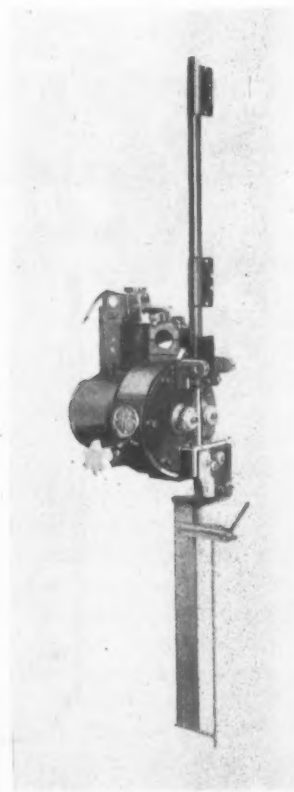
Welding Head Equipped for Feeding Short Electrode Lengths
